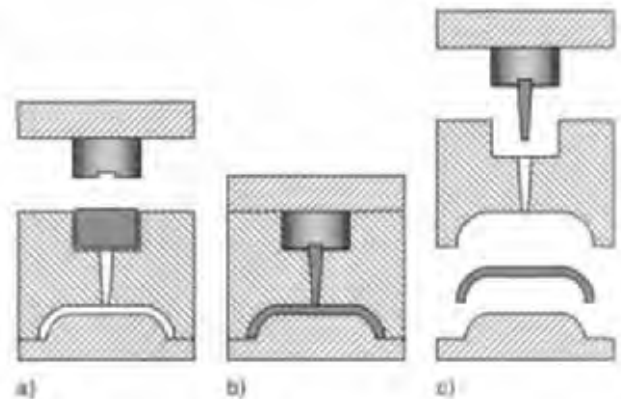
B2 Simplified sectional view of transfer molding. a) A heated preform of thermosetting material is placed in the transfer pot. b) The mold closes, forcing the material into the sprue channel, through the gate, and into the mold cavity. c) After the material is cured, the mold opens, pulling the sprue away from the part, and the part is ejected from the cavity.
